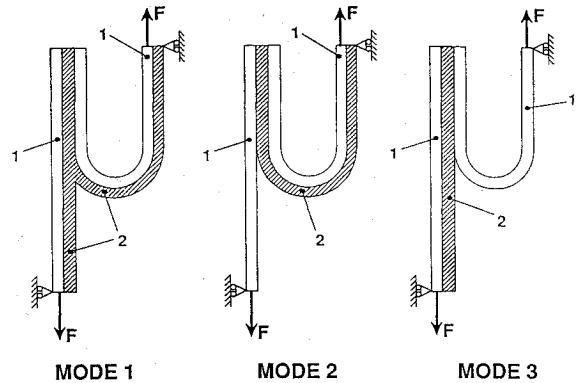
Modes of fracture in peel joints: F , peel force; 1, adherends; 2, adhesive layer.
